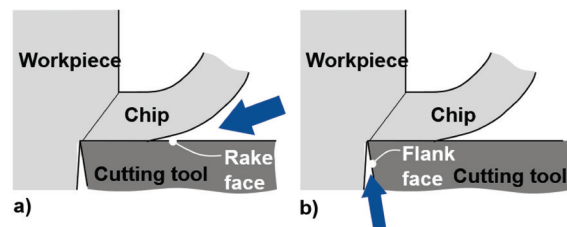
MWFs supply: a) between chip and rake face; b) between workpiece and flank face
